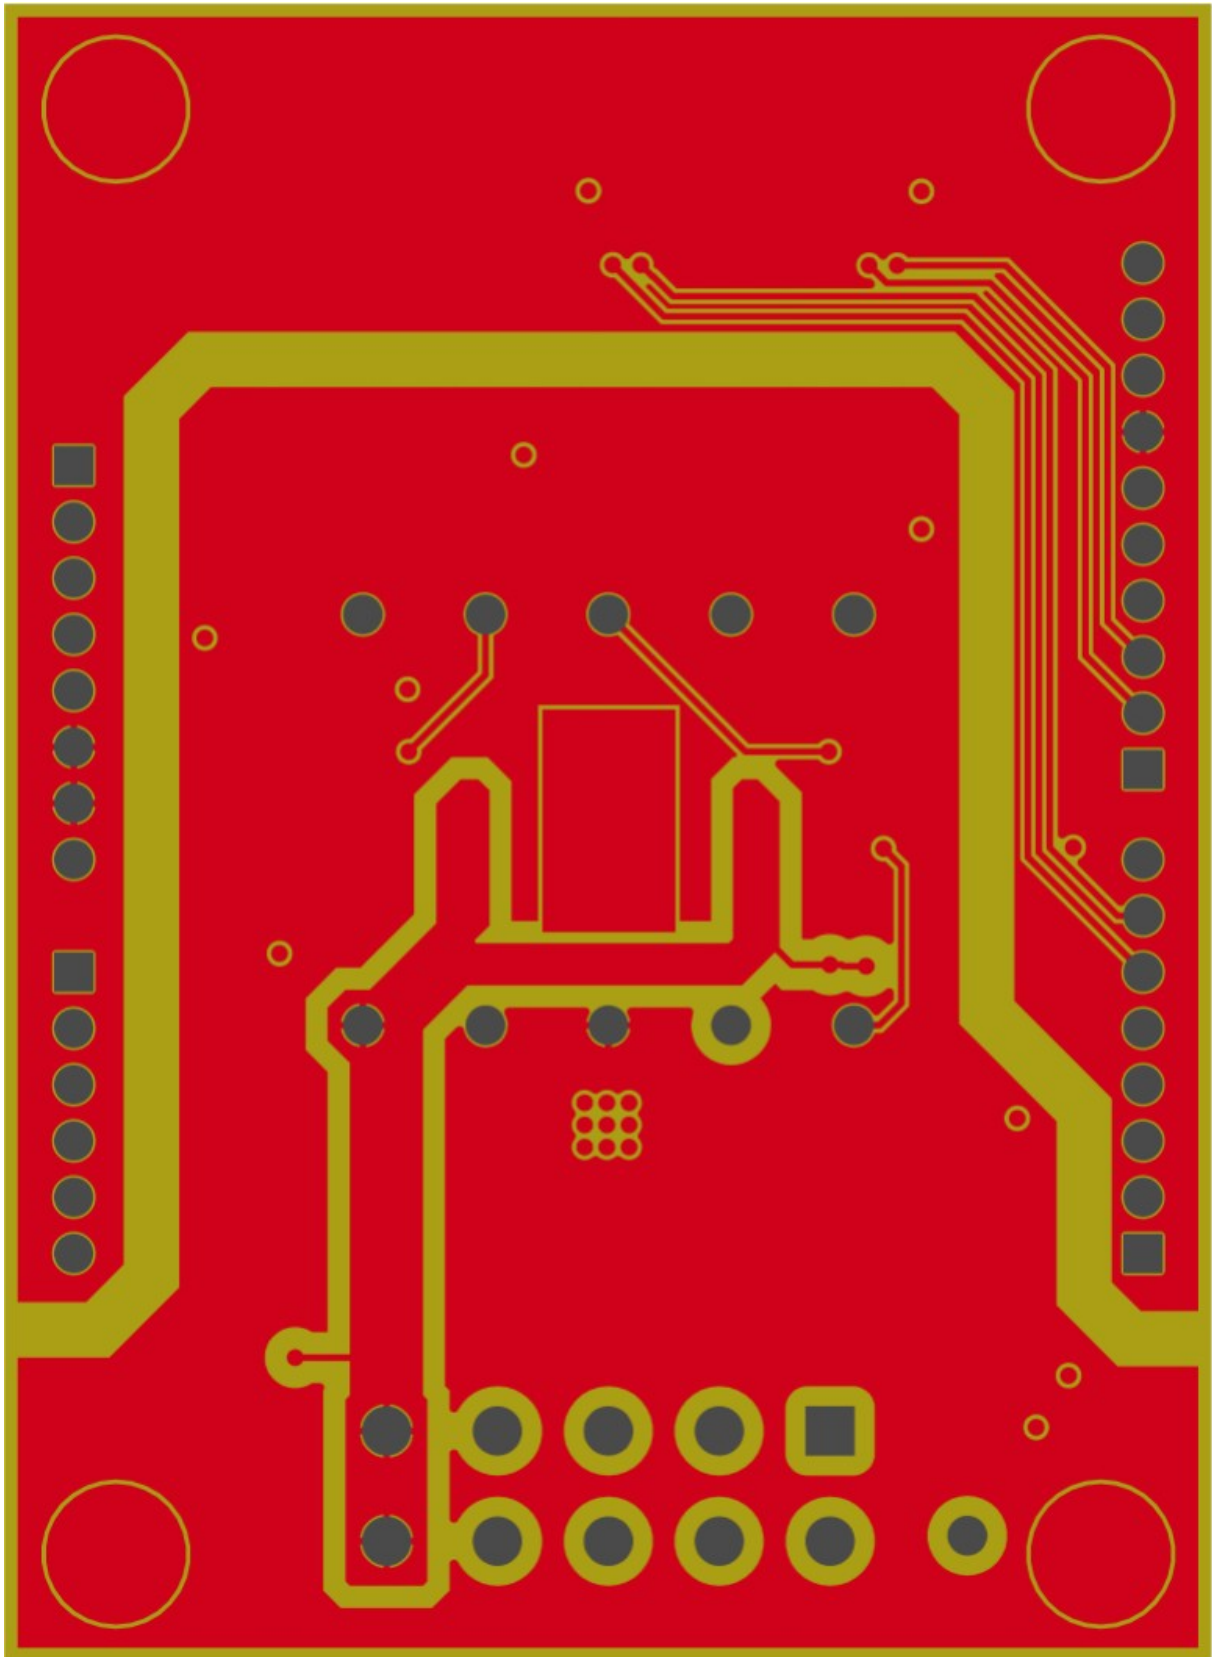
BOTTOM LAYER LAYOUT AND SOLDERMASK
